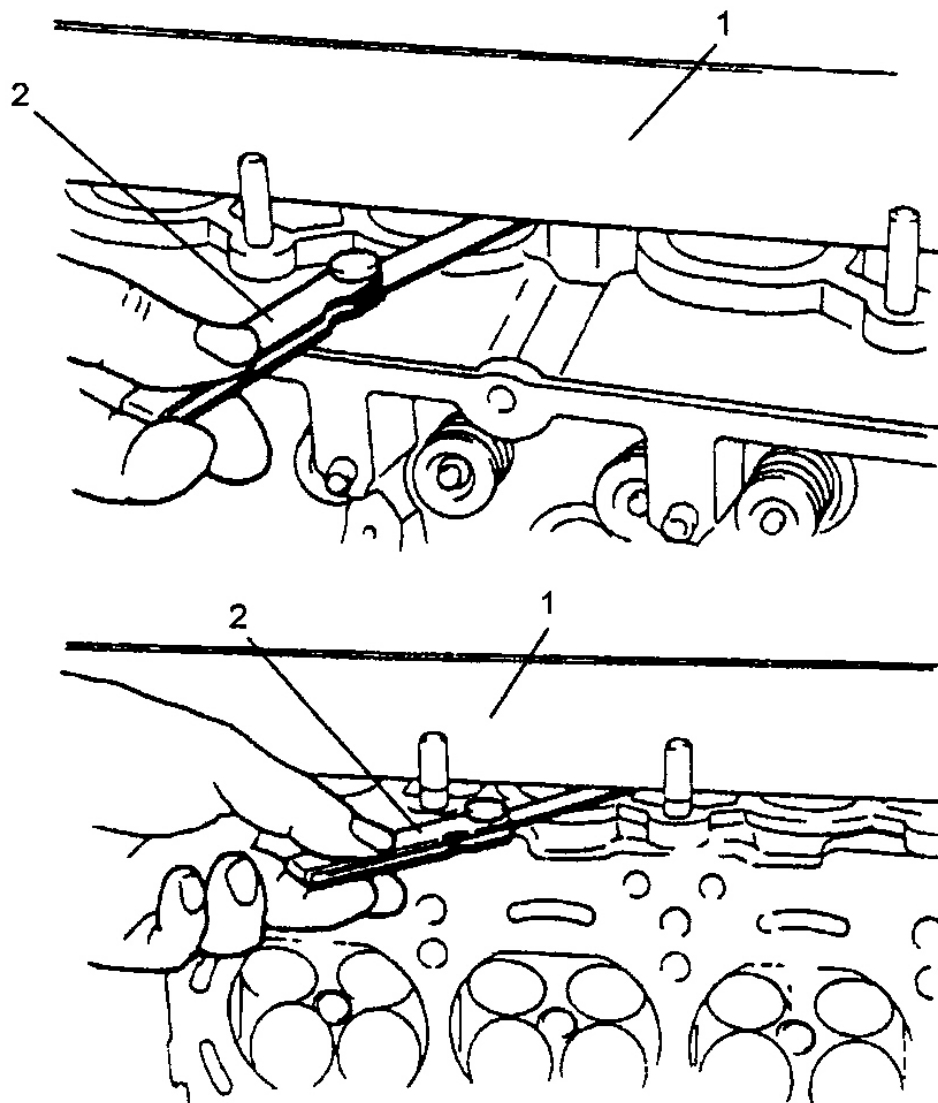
Checking Cylinder Head For Cracks On Intake And Exhaust Ports, Combustion Chambers, And Head Surface Using Straightedge
